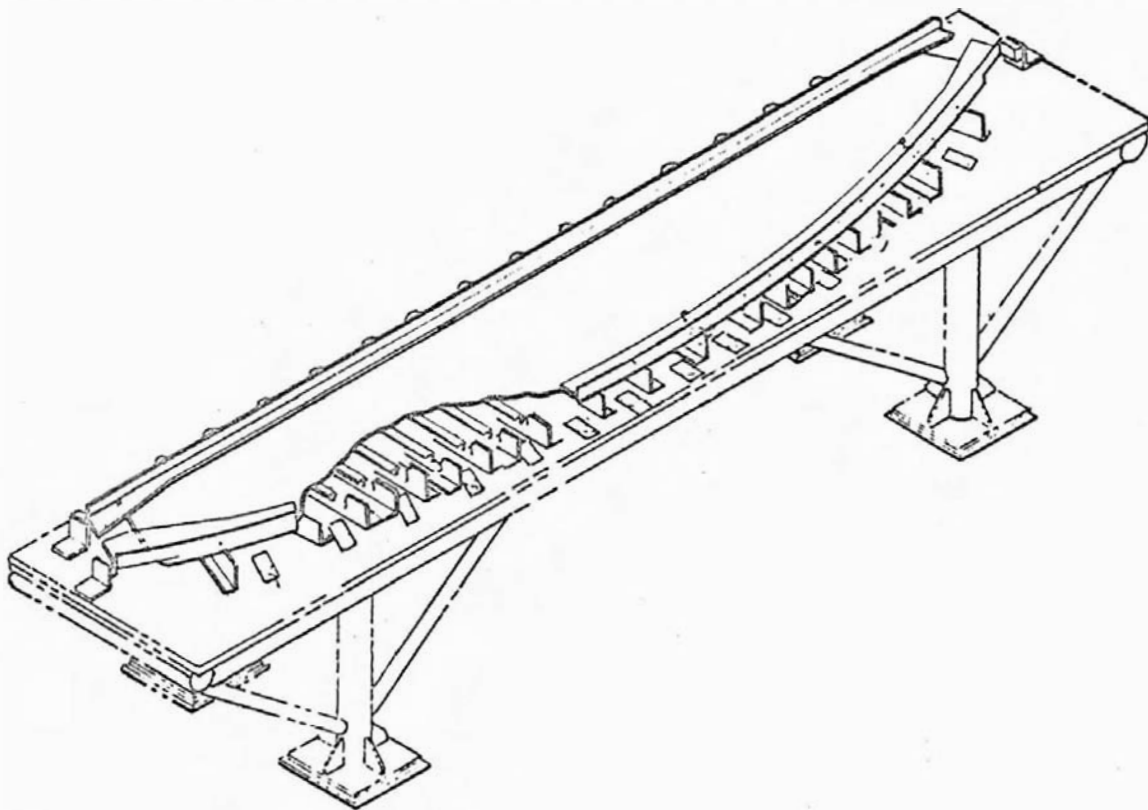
Intermediate Ring Assembly, Assembly Fixture AF-335-19110
